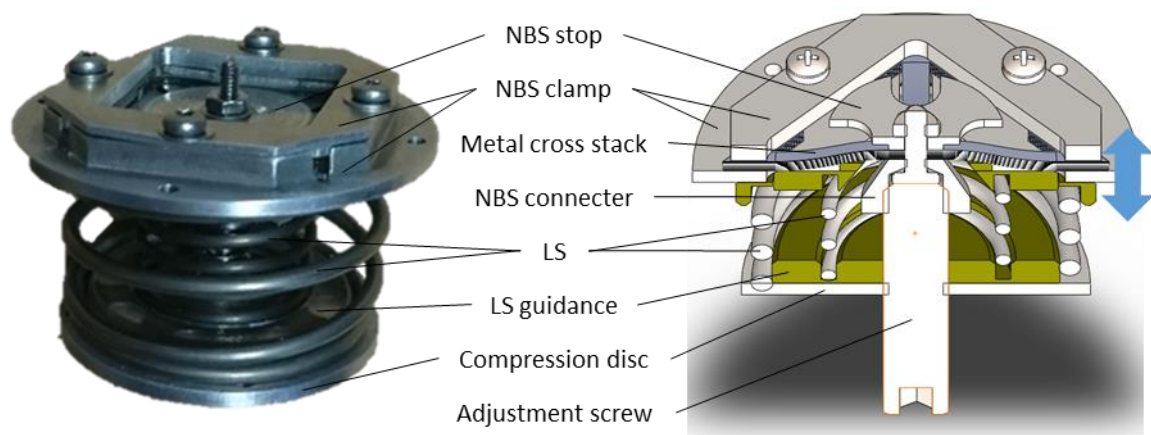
Photograph and CAD model cross-section of an assembled biasing mechanism with two compressed LSs.
